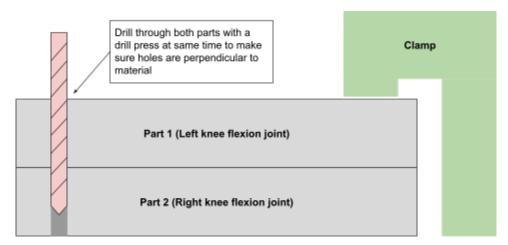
Match drilling example. Both parts are identical, and used symmetrically on the device. A drill press should be used to ensure perpendicular holes. Always center drill prior to drilling through with the intended drill bit.
